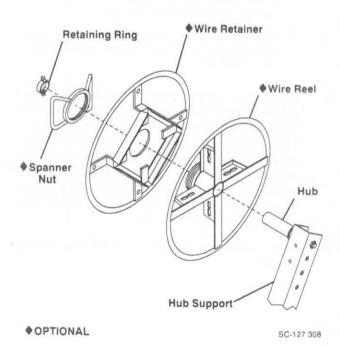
Optional Wire Reel And Reel-Type Wire Installation
